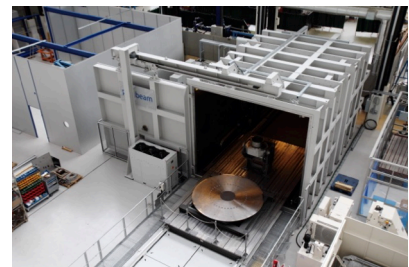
Large electron beam welding chamber at the Nuclear AMRC which will be used to assemble SMR components
